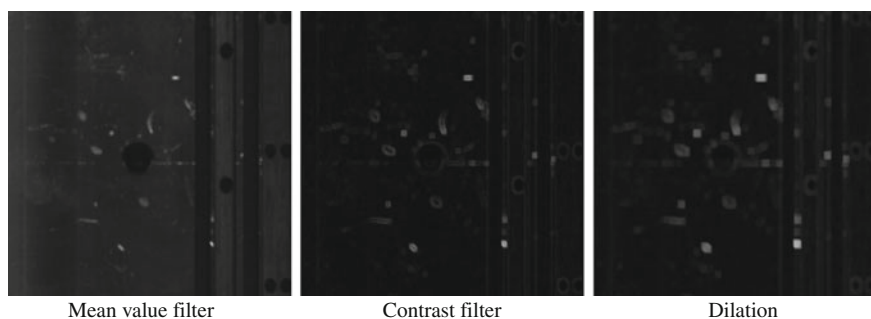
Valve body with damaged contact surface after preprocessing
